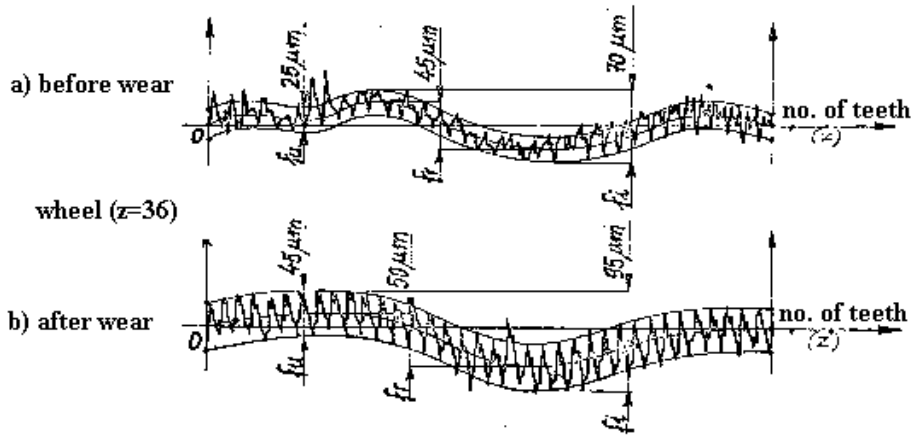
Gearing co-operation errors for new gearing a), and for failed gearing by pitting b)
